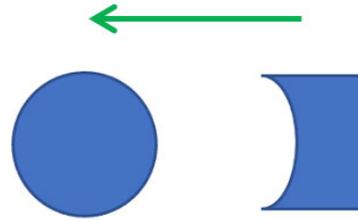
Orientation of the O-rings: main O-ring (left), backup O-ring (right)
